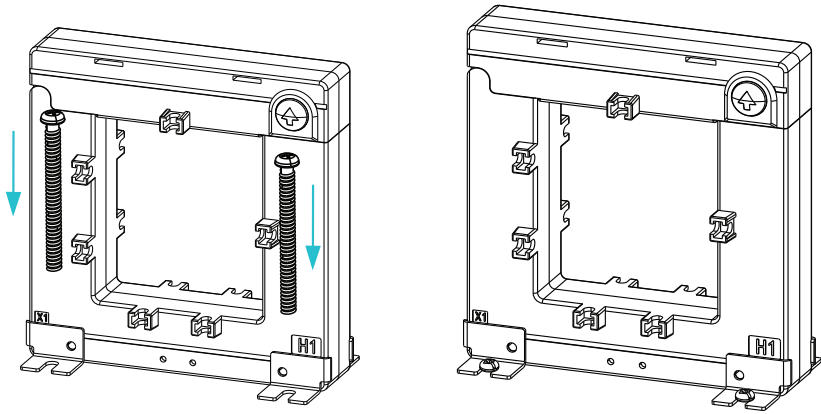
Mounting Screw in AcuCT-3337A to Panel
